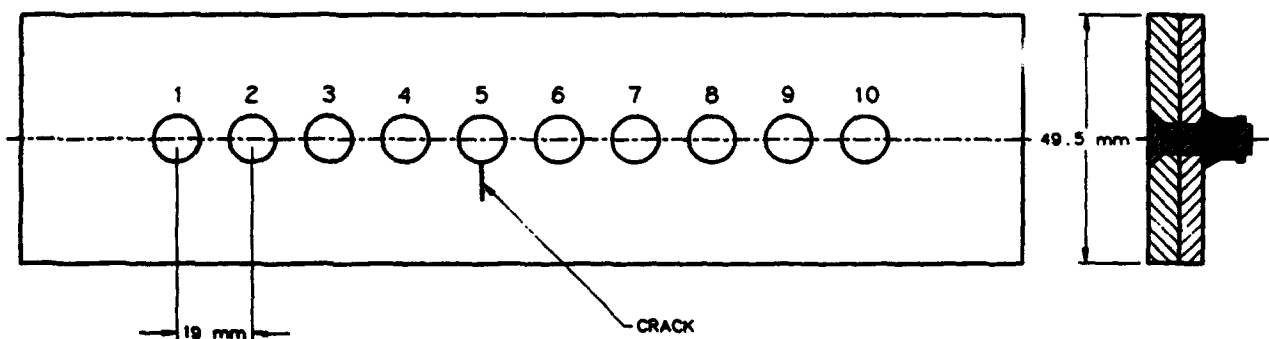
WL/MLLP specimen configuration: layer dimensions and crack sizes are given in Table 1; fastener diameter is 6.4 mm.
